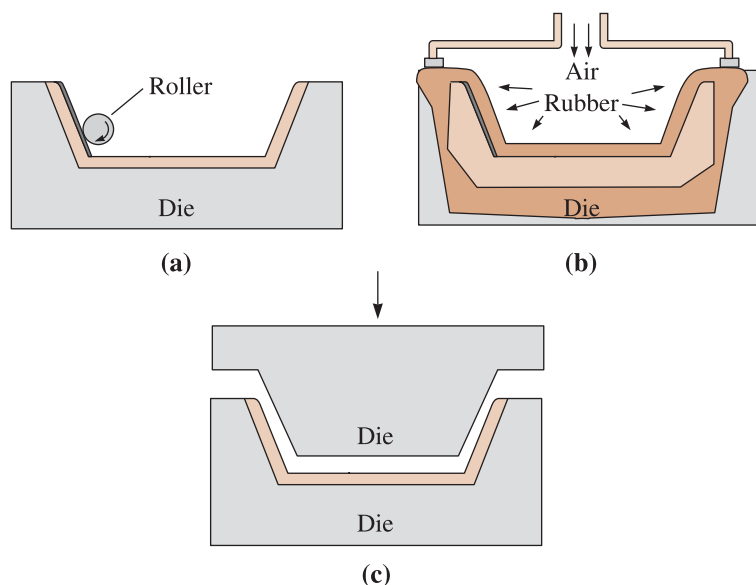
Producing composite shapes in dies by (a) hand lay-up, (b) pressure bag molding, and (c) matched die molding.
